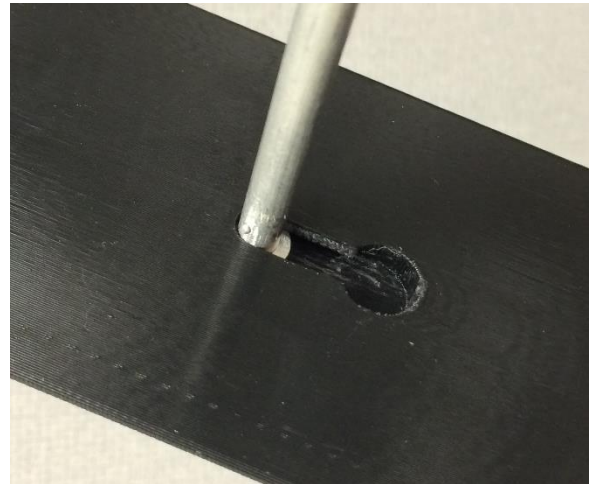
Slip-Lock Connection between Turbine Blade and Connecting Rod
